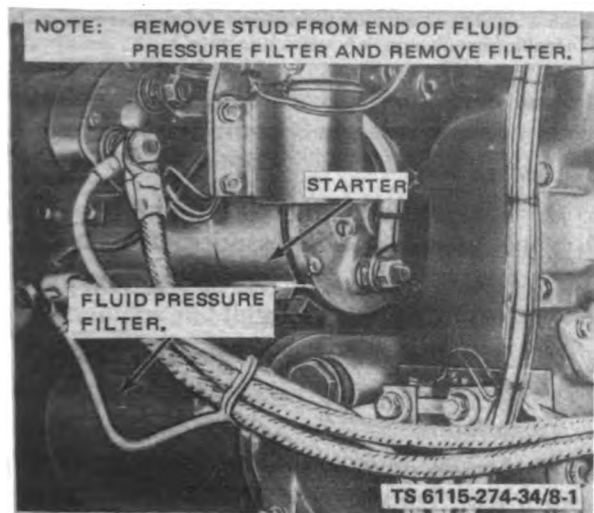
Fluid Pressure Filter, Removal and Installation
